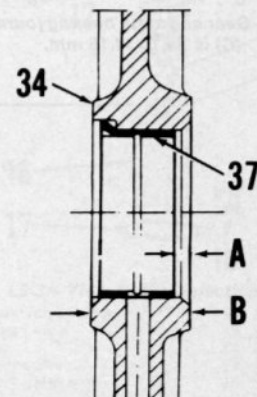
Depth (A) of bearing (37) in end support (34) should be 5 mm. Support width measured at (B) is 33.90-33.95 mm.
